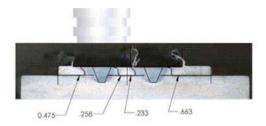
FSW tool superimposed over a lap welded plate exhibiting interface lifting at the edges of two welds
